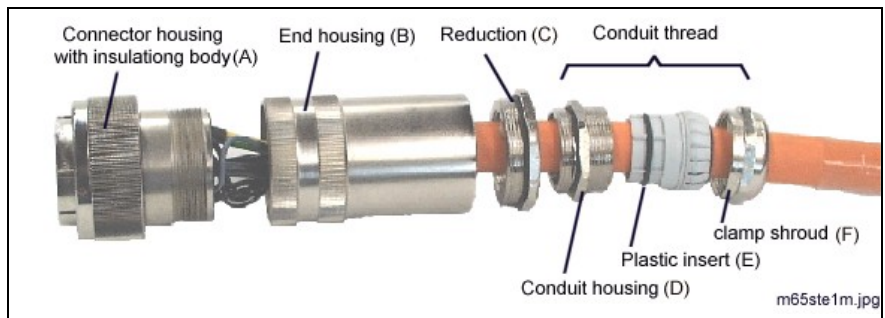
Individual parts of connectors INS0481, -0482, -0486
